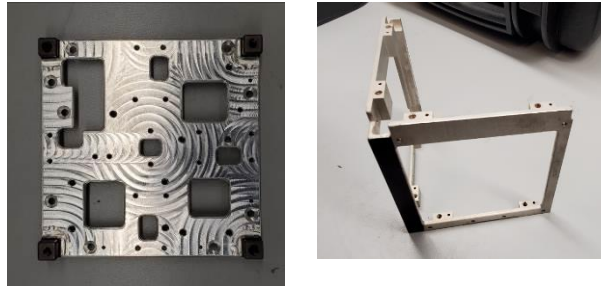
GT-1 -Z Plate (left) and one piece of side wall (right)
